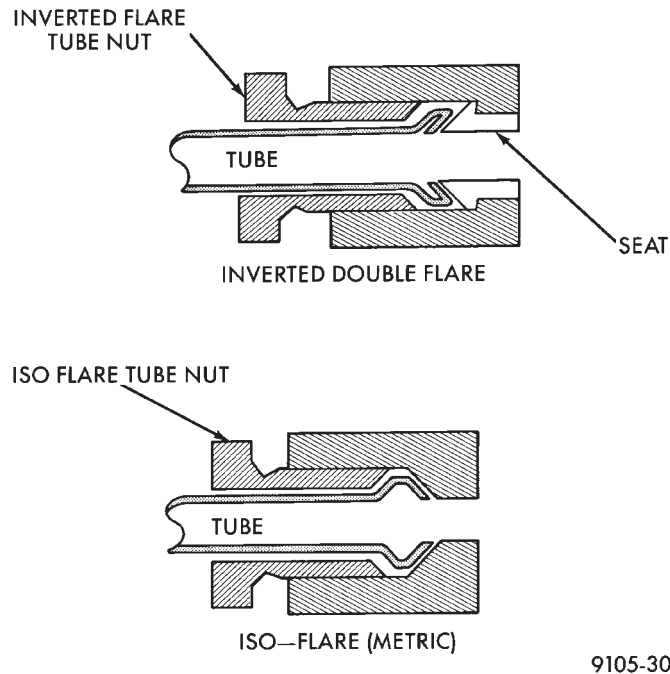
Inverted Double Wall Flare And ISO Flare Tubing Connections
